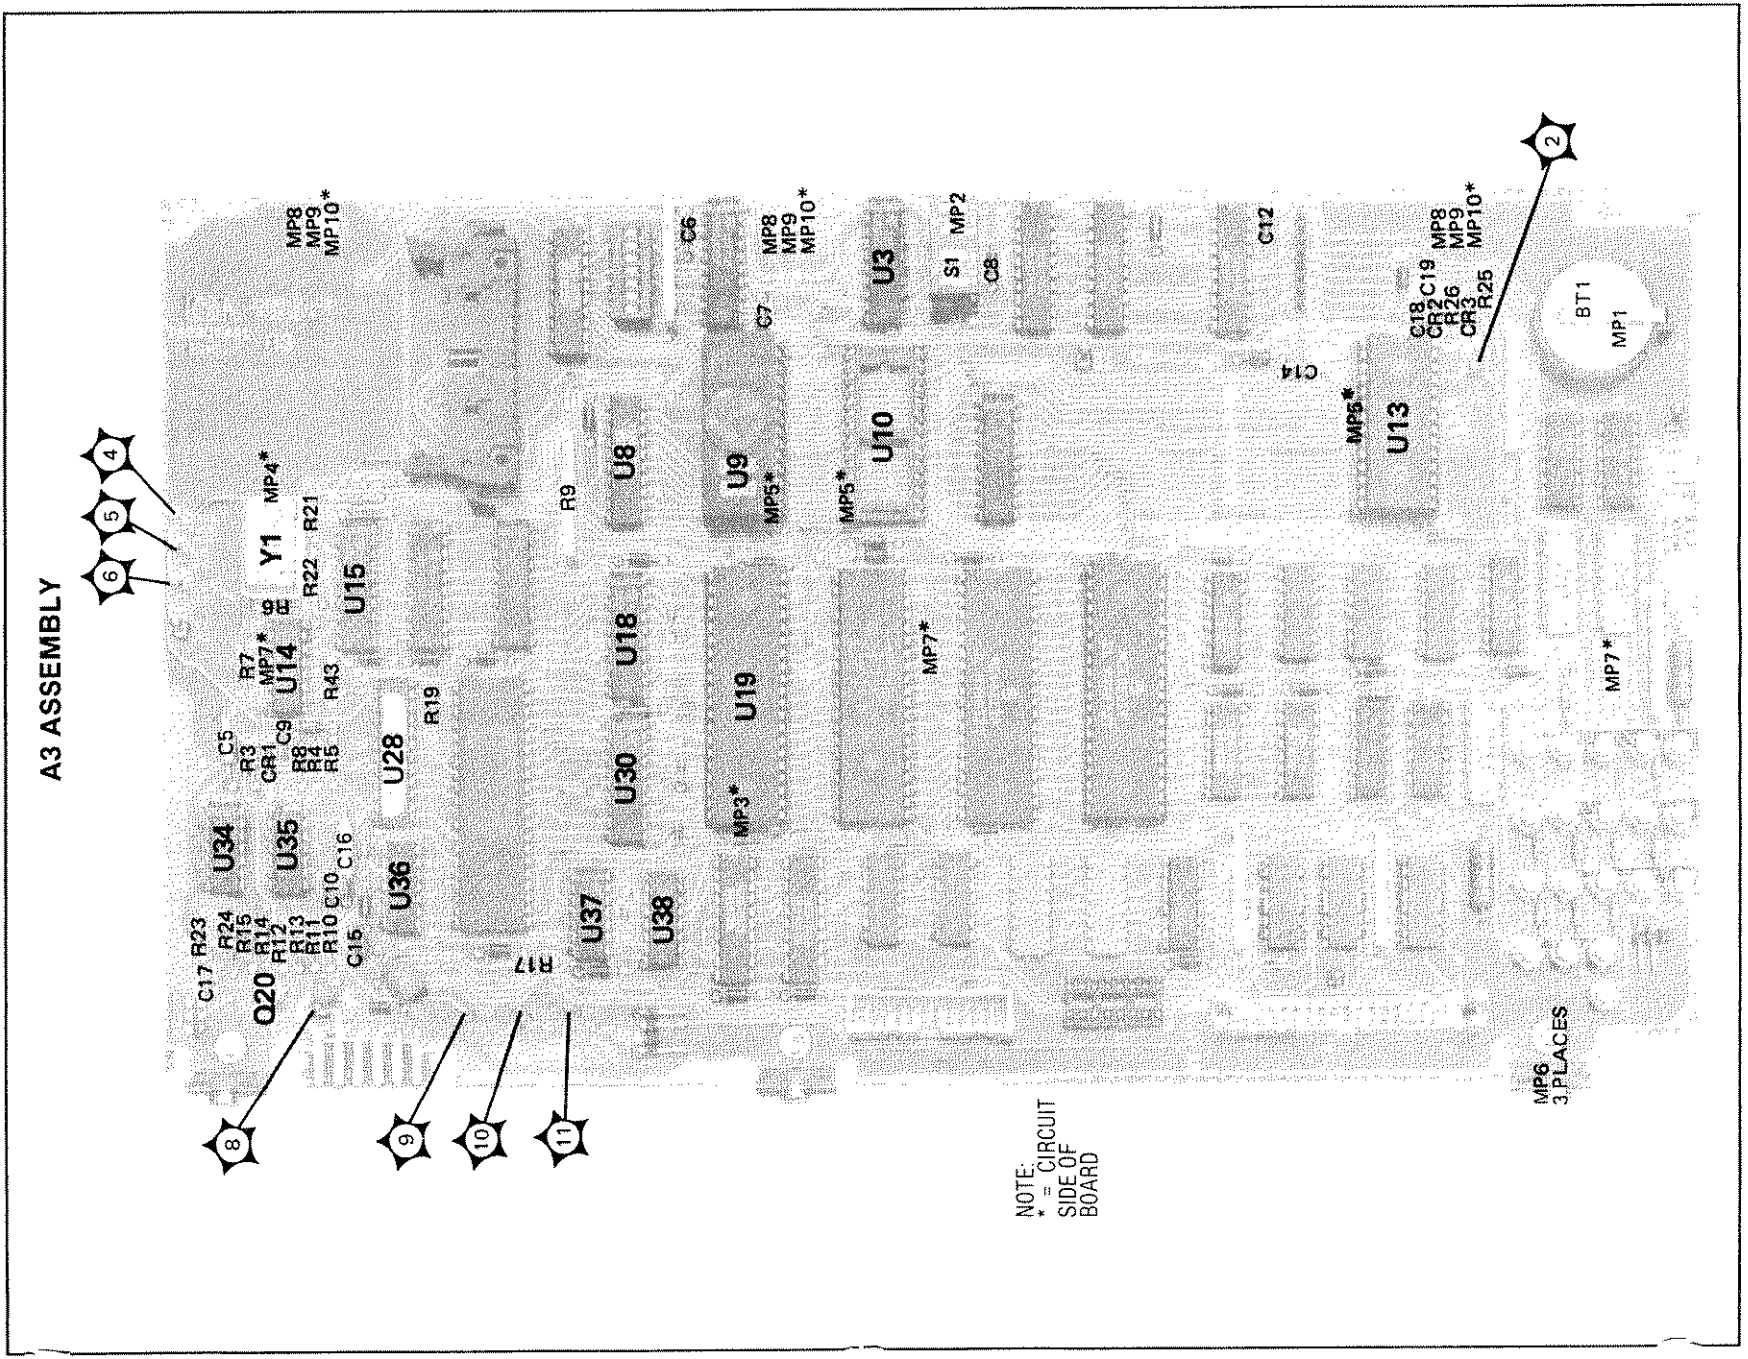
P/O Central Processing Unit Assembly Component Locations
